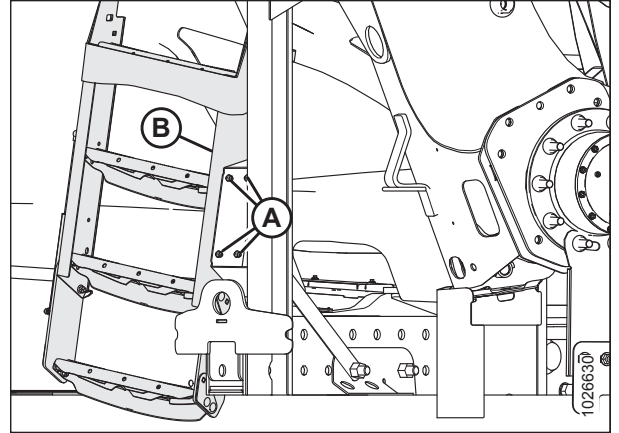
Handrail under Fuel Tank Shipping Assembly
